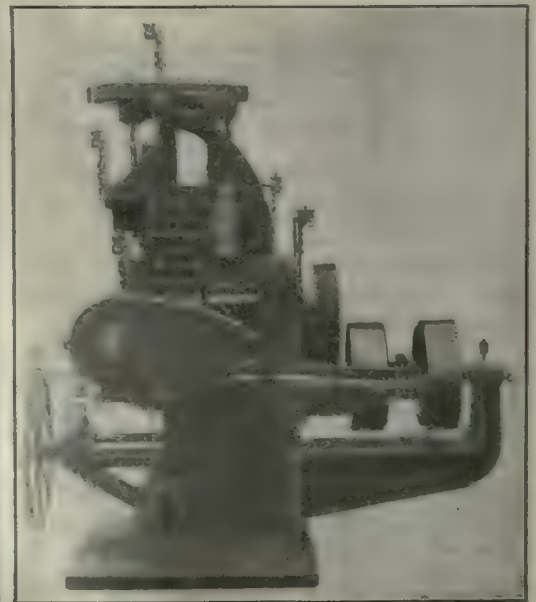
MECHANICAL CONTROL OF BELT-DRIVEN MACHINE
